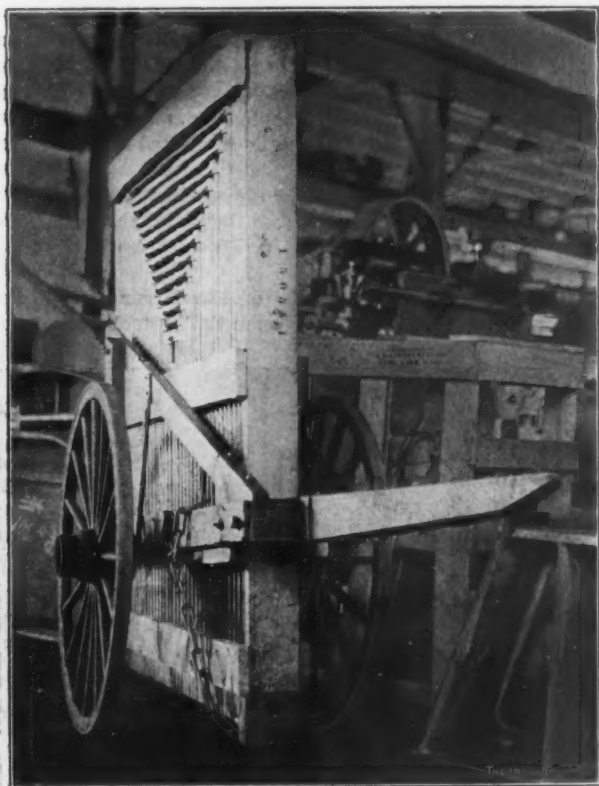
Special Two-Wheeled Truck for Handling Heater Sections After Crating.
